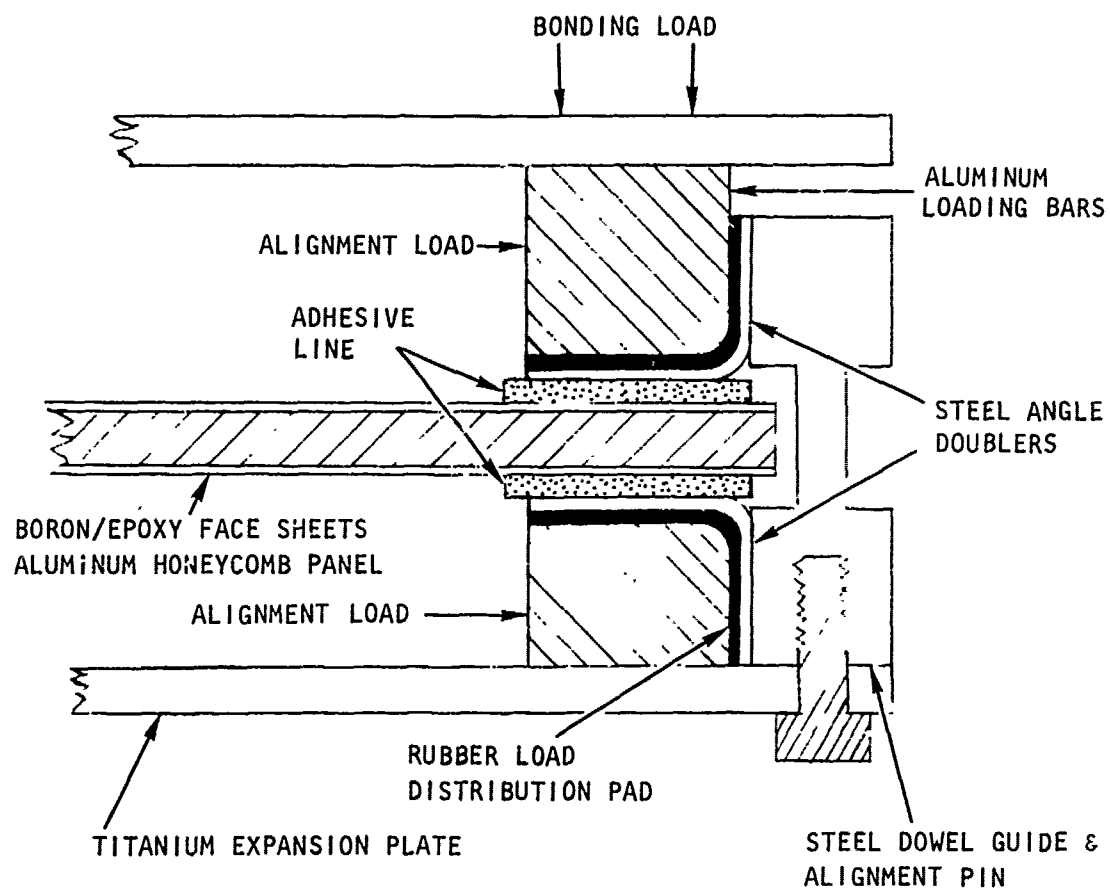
Angle Doubler Installation Tooling for Shear and Combined Load Boron/Epoxy Honeycomb Sandwich Specimens
